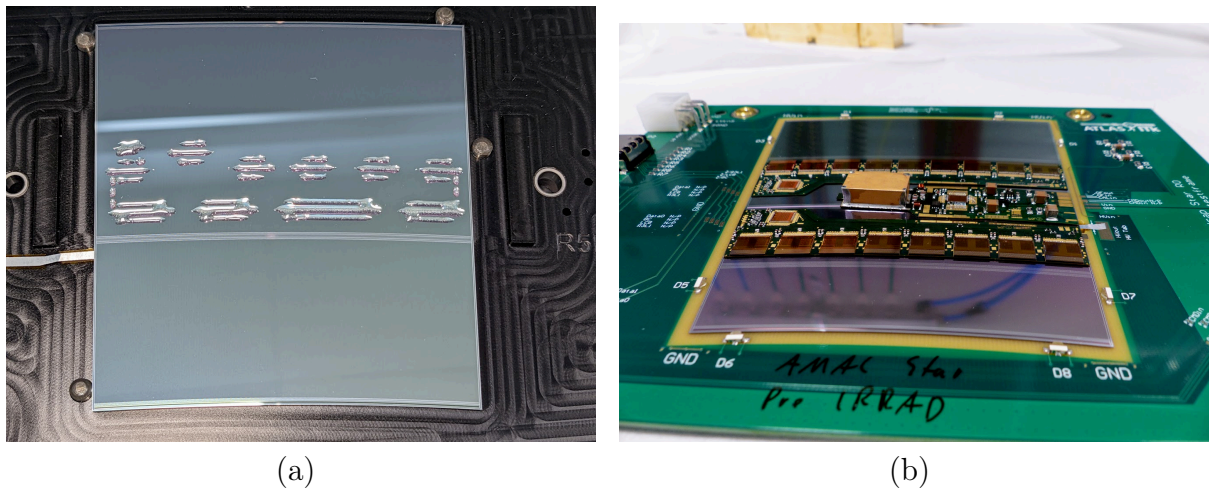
In (a), the R0 sensor is placed on a vacuum jig with a glue pattern deposited on top, and the HV tab is attached. In (b), the fully assembled R0 module at DESY Zeuthen is shown.
